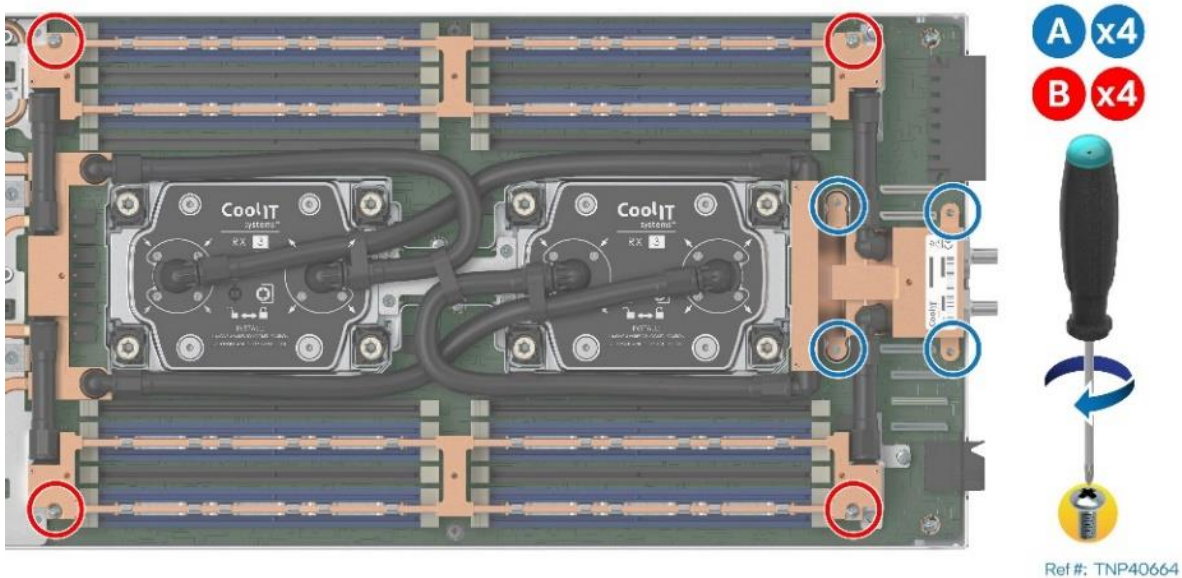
Securing the Quick Disconnect Block and Memory Cooler
